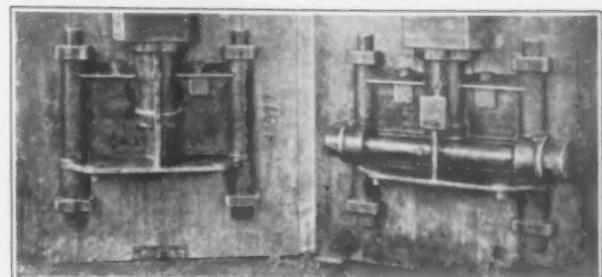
The Same Pattern Mounted on Boards for Machine Molding
